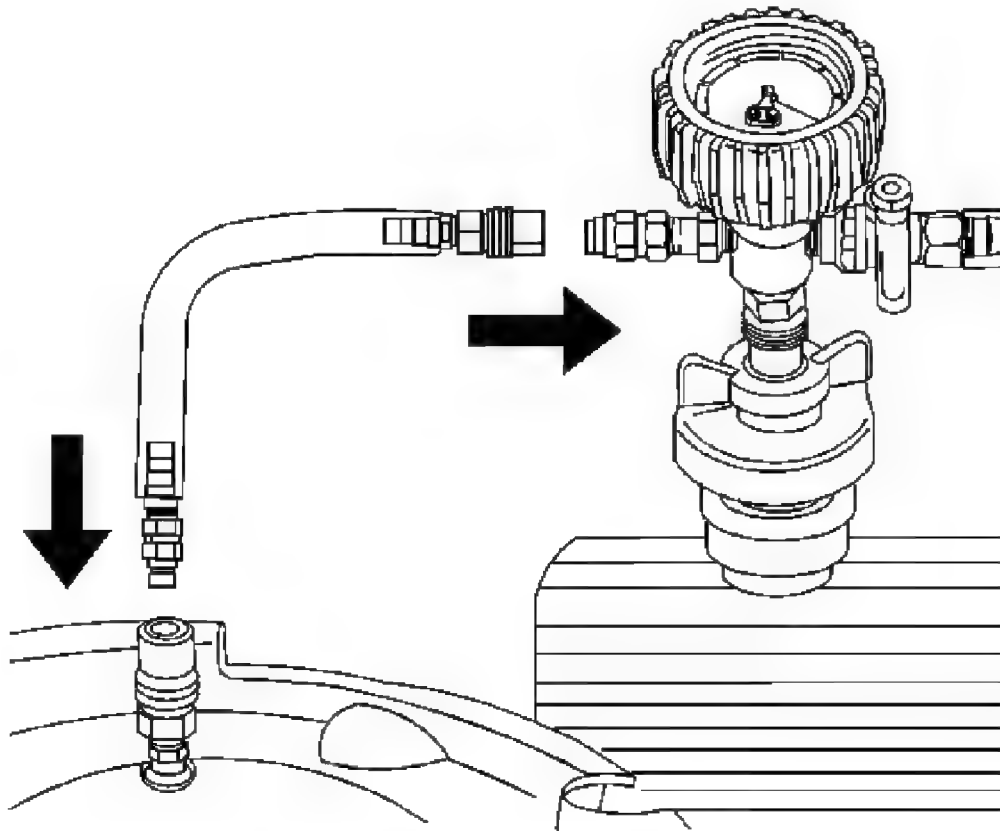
Attaching Vacuum Hose To Vacuum Gauge Assembly & Vacuum Tank
